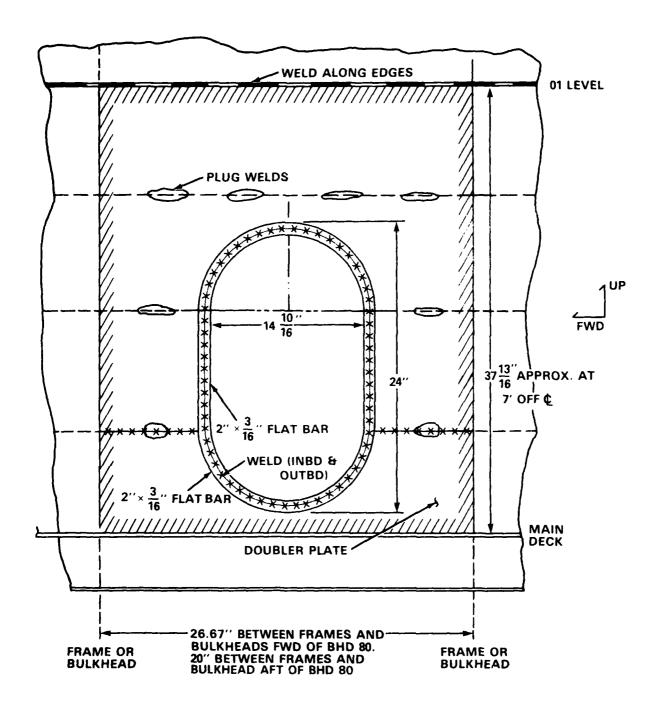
Typical Deckhouse Side Access Hatch Opening after Structural Modification
